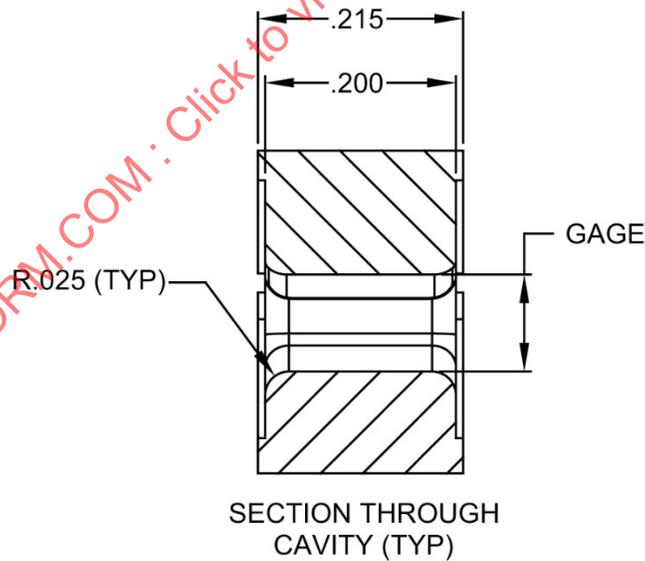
M22520/44-01 CRIMPING TOOL JAW DETAIL
